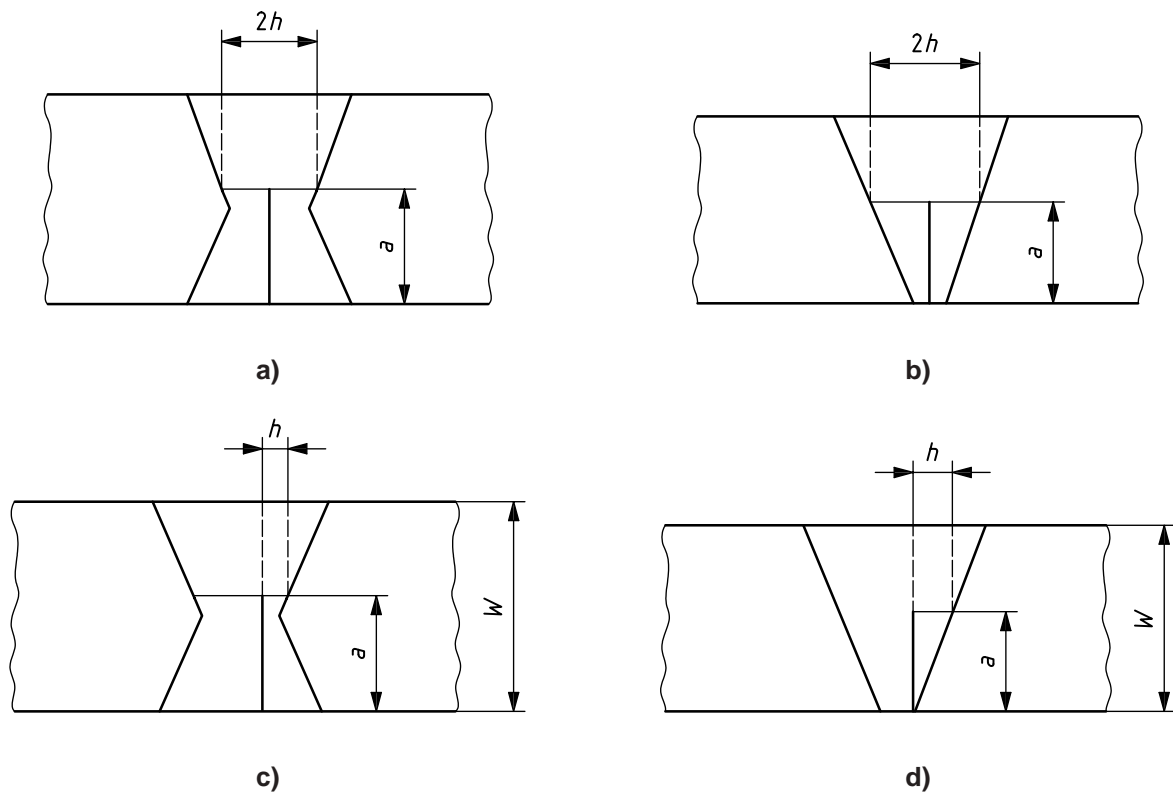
Definition of h and $2h$ in surface-notched (NQ) specimens from double- and single-sided welds
